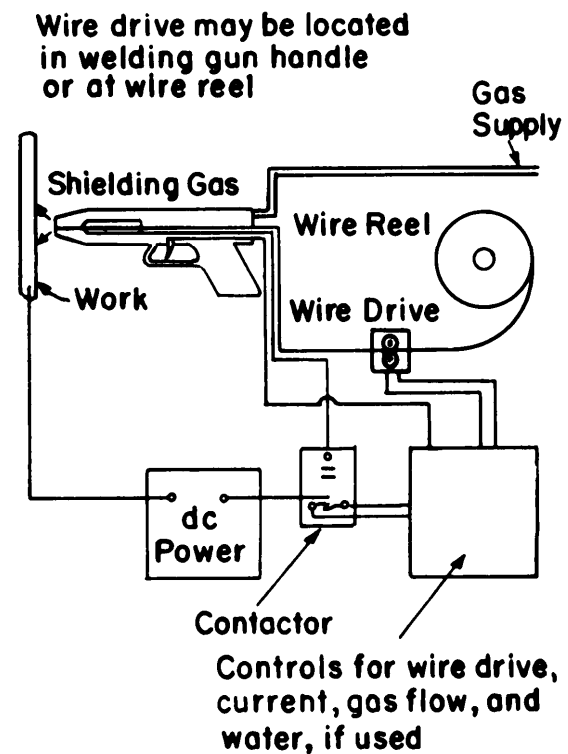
Schematic Diagram of Equipment for Inert Gas Metal Arc Consumable Electrode Welding
